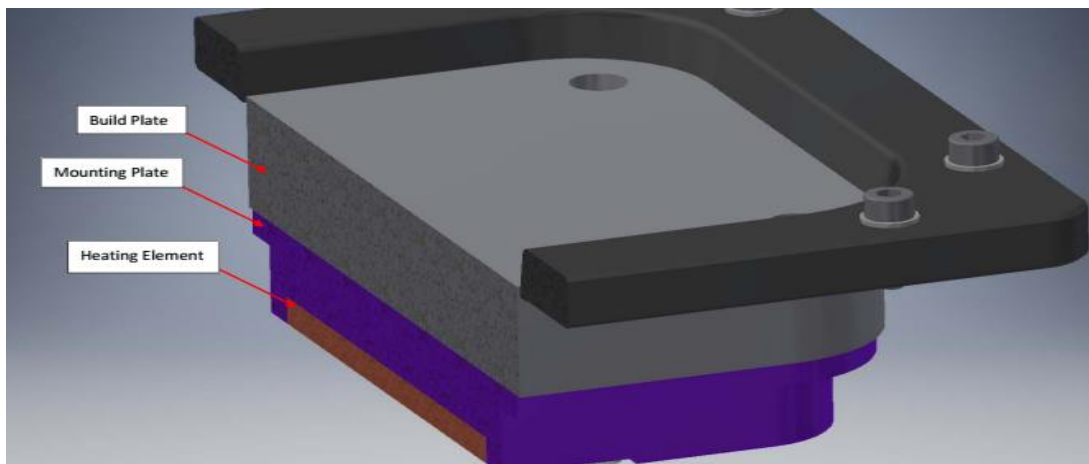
B: CAD layout of build plate, mounting plate, and heating element, provided by SLM
